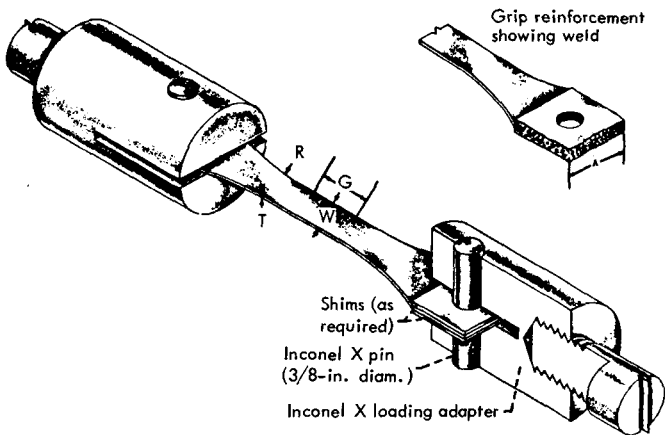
Stress-rupture specimen and loading adapter (ref. 4).
